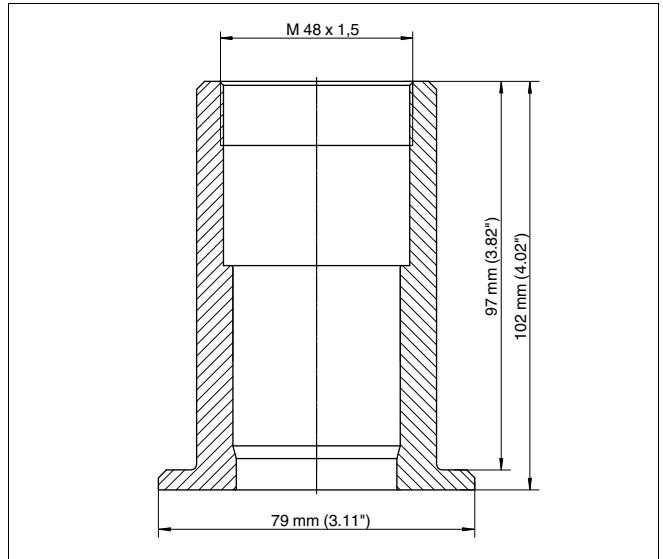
Dimensions welded socket M48 x 1.5
